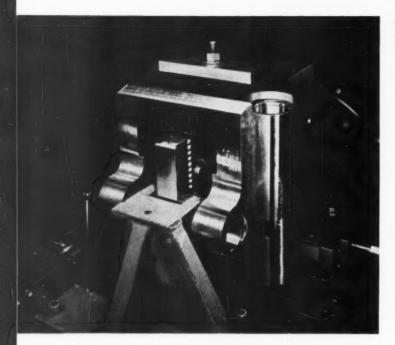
Close-up view of the machine in Fig. 5, the work being held on a shuttle slide which moves back and forth between usage of successive broaches
